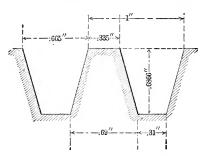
Brown & Sharpe 29-Degree Worm Thread
